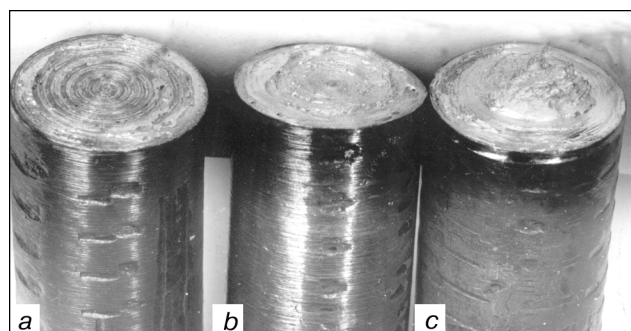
Fracture surfaces of welded joints produced at a heating pressure of 25 (a), 40 (b) and 50 (c) MPa
